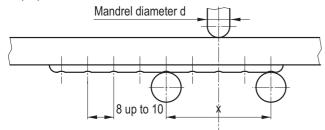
Preparation of bend-test specimens for hard surfacings
